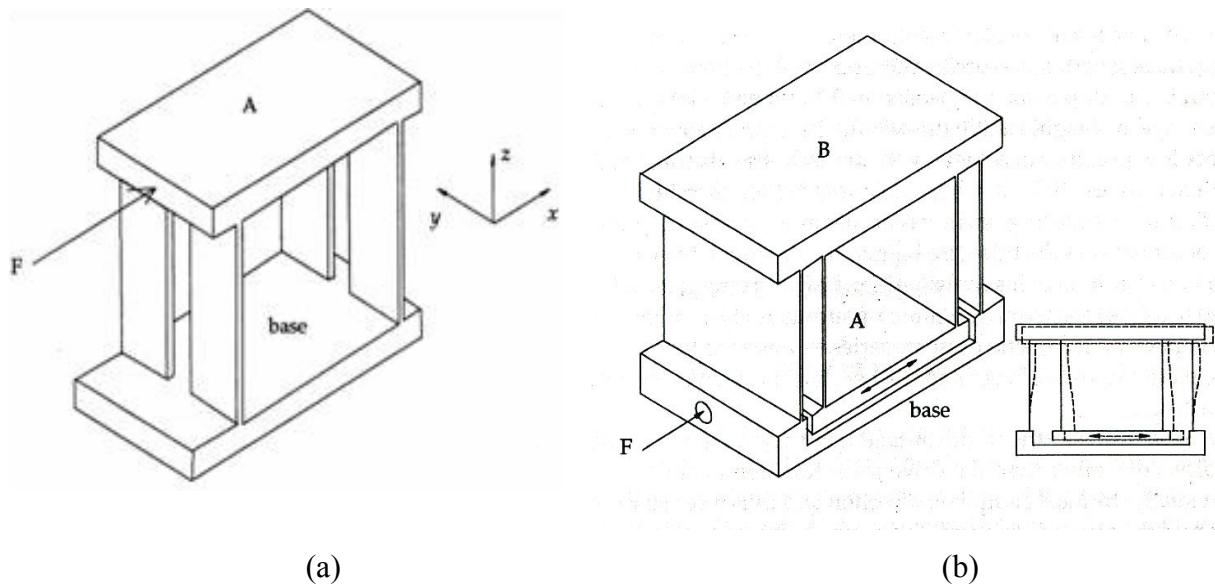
(a) Simple Linear Leaf Type Mechanism , (b) Compound Linear Spring Mechanism [5]
